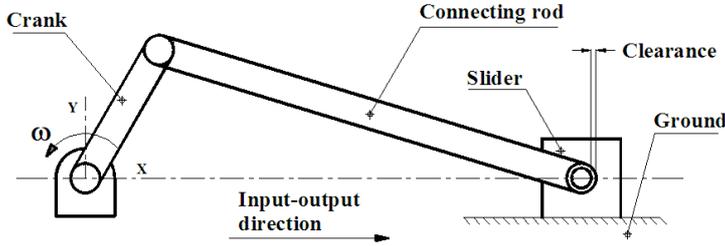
Slider – crank mechanism with one clearance revolute joint
